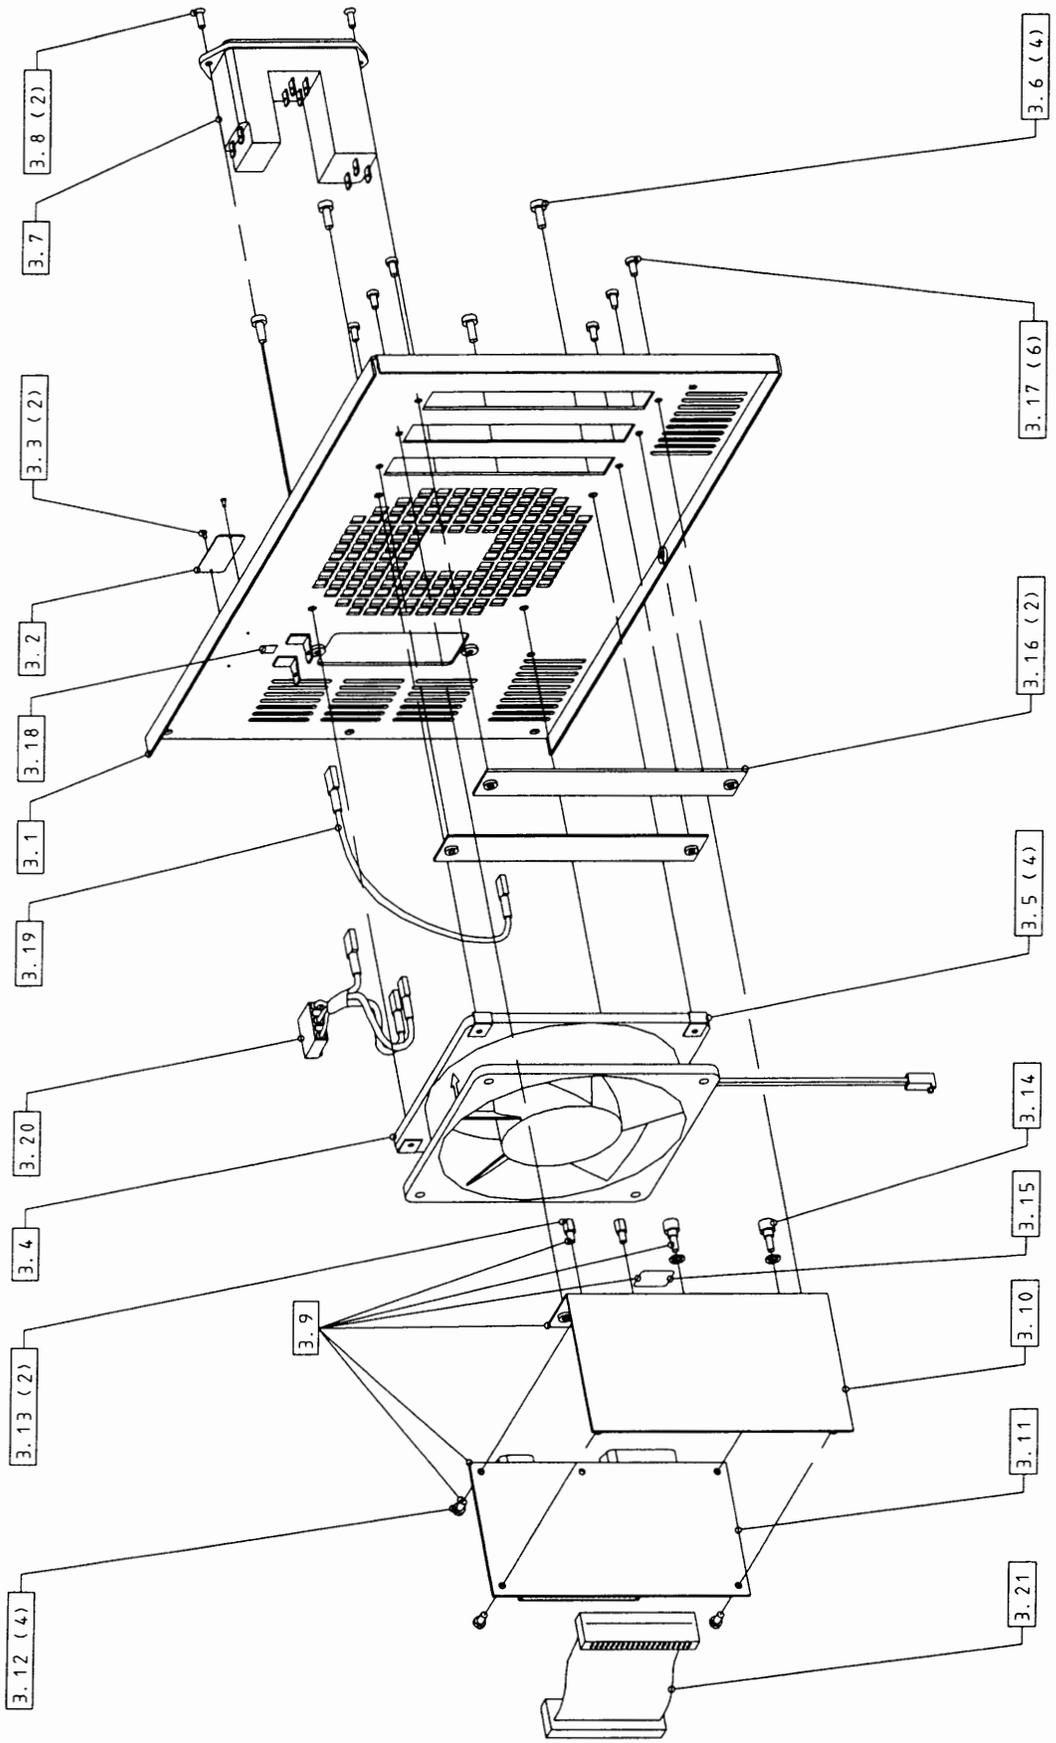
9314A/M/L Rear Panel Exploded View (ECO 1001)
